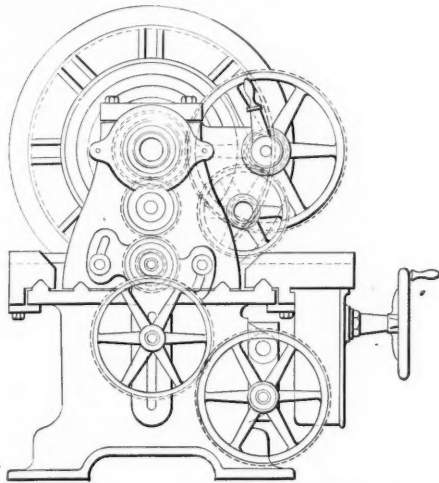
Change Gearing of Bradford 36-inch Triple-gear Lathe.
